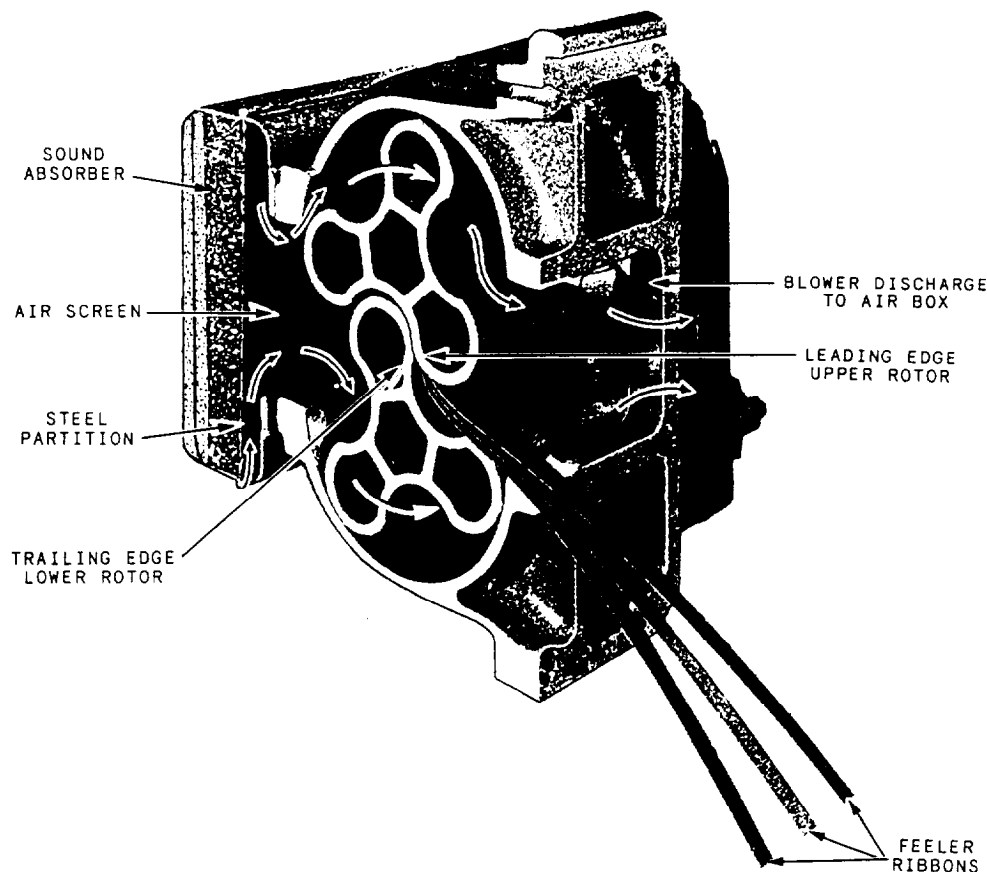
Checking clearances of positive-displacement blower lobes.
